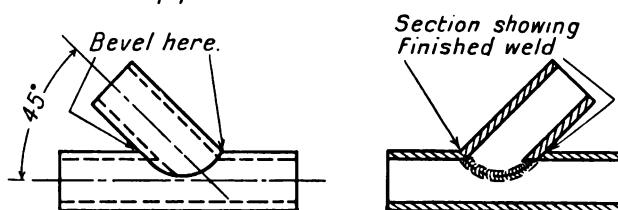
Showing pipe at 45 degrees, weld and bevel.
